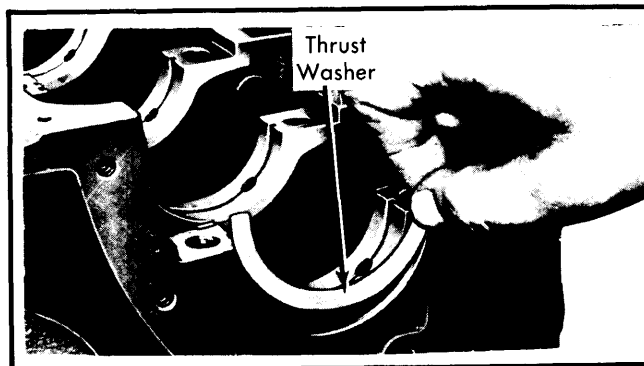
Fitting Crankshaft Thrust Washer to Block
